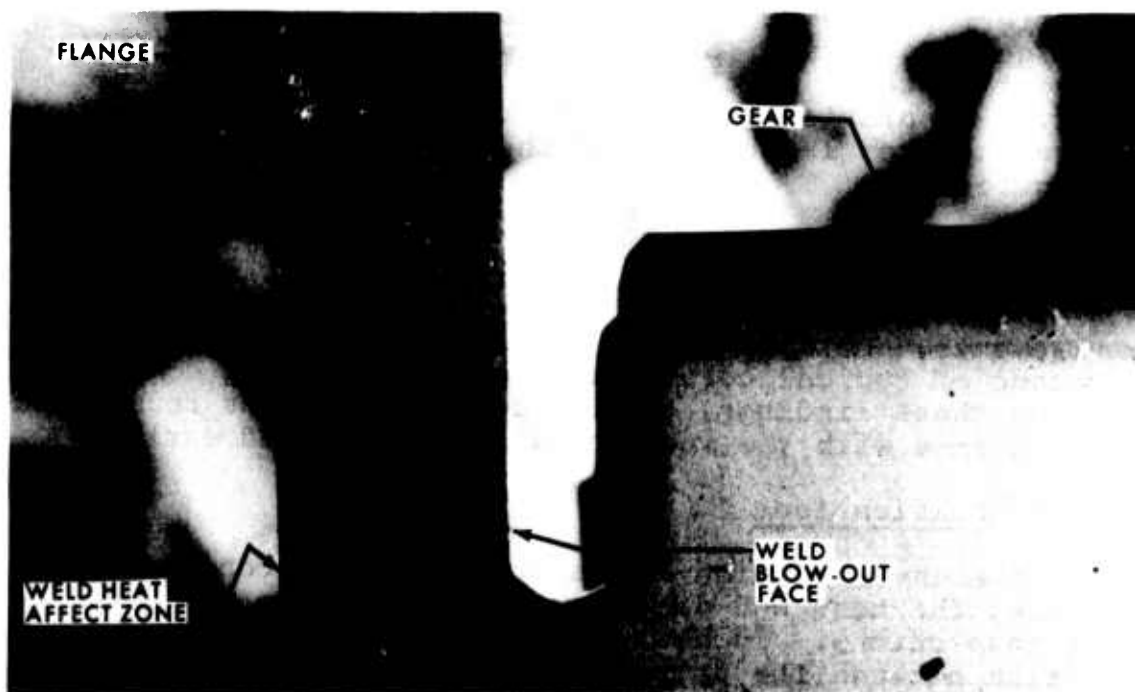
Crack Propagation - Gear/Flange Assembly, Second-Row Pinion.
